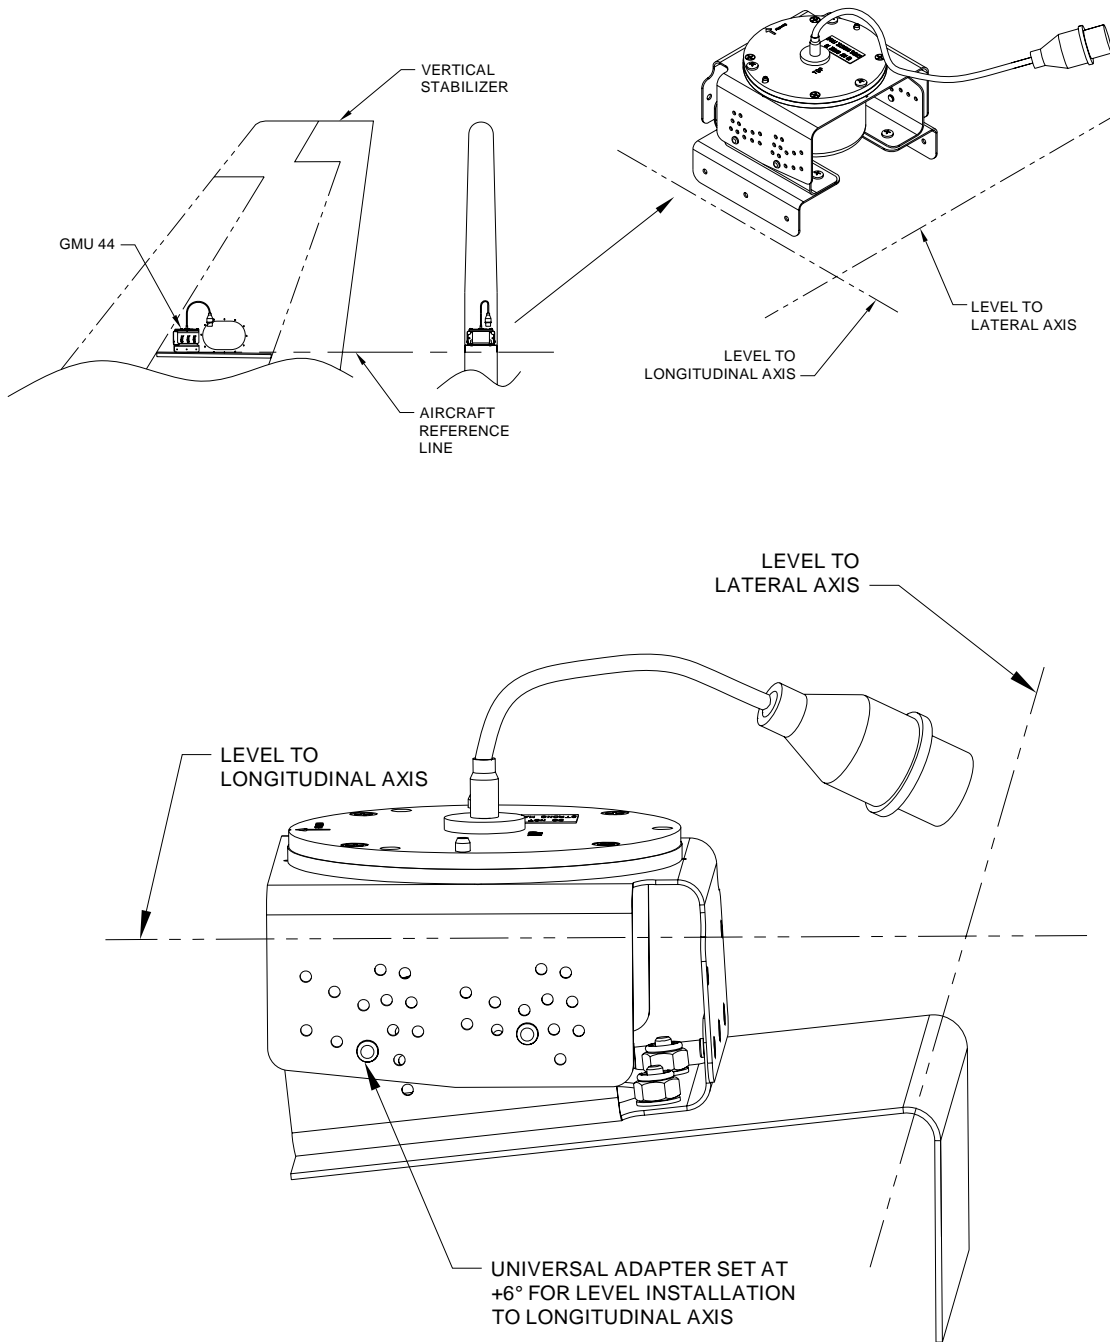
Example GMU 44 Universal Mount Level Installation Using Support Equipment
